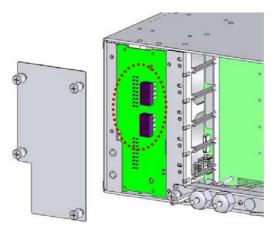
Shelf ID Board with two E<sup>2</sup>PROMs (rear cover removed)
